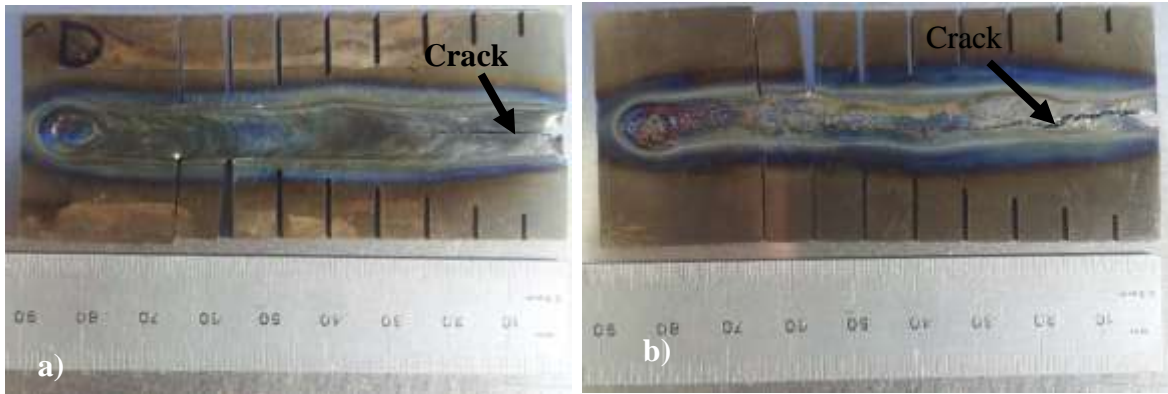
Photography of cracked sample D:0.4Ti;0.6Nb at a welding speed of 6 mm/s a) top b) bottom
